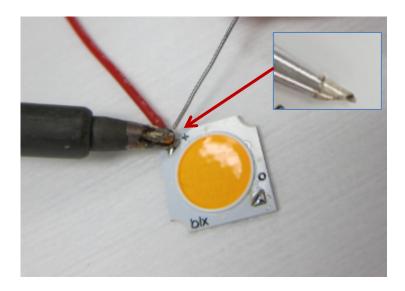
Pre-tinned solder pads and soldering a pre-tinned wire to a solder pad
